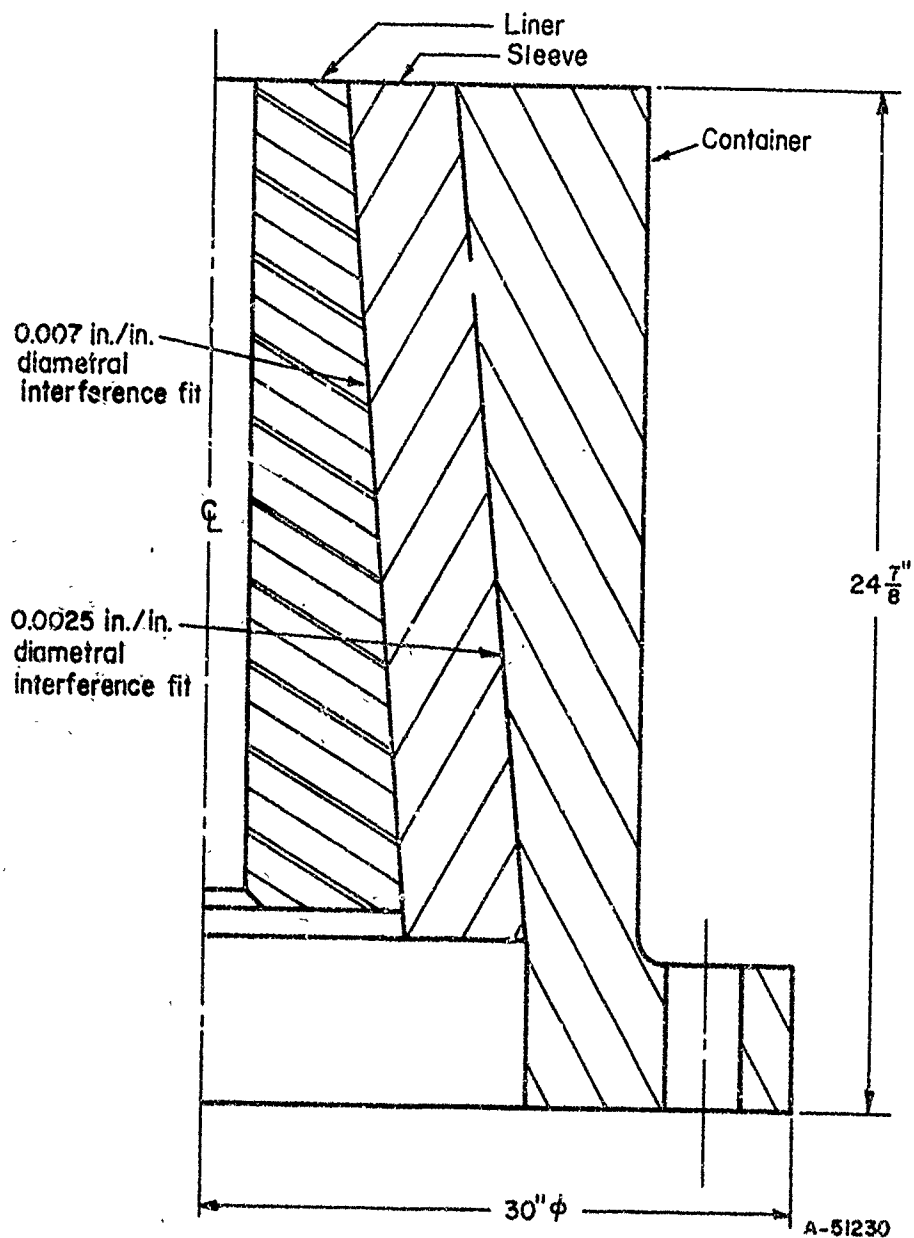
CROSS-SECTIONAL VIEW OF CONTAINER I
